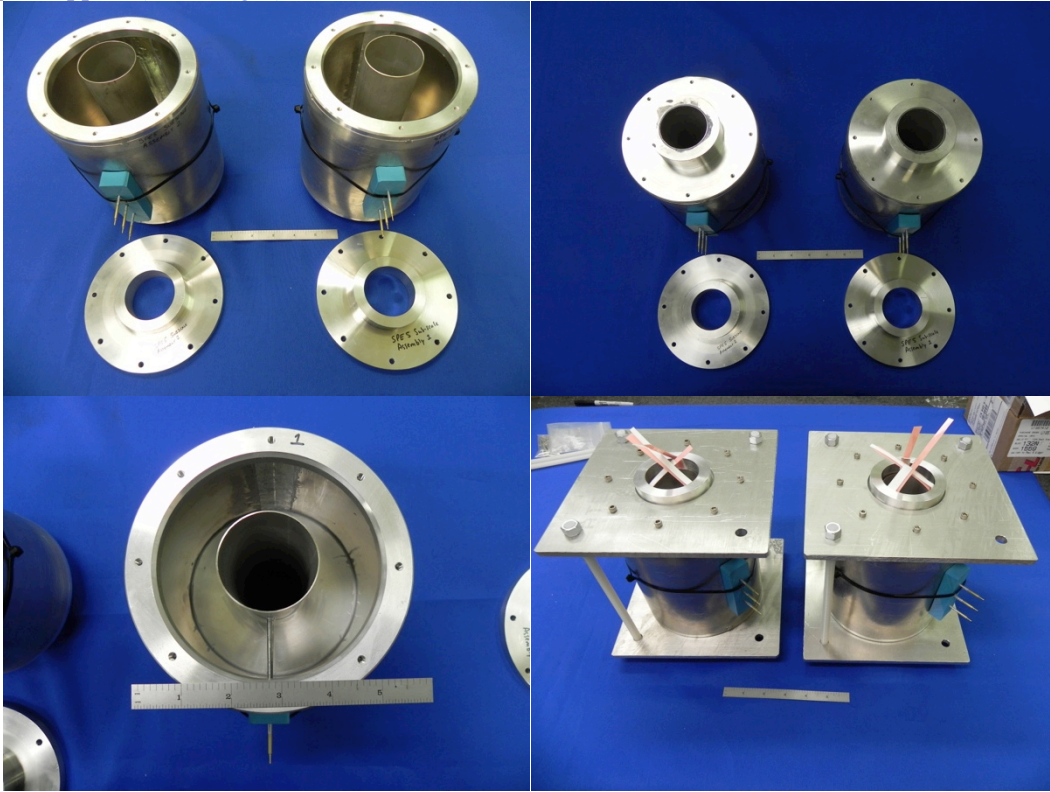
A series of photographs showing the top view (upper left), bottom view (upper right), interior view (lower left), and final assembly for shipping (lower right) of both of the SPE5 sub-scale experiment canisters.
